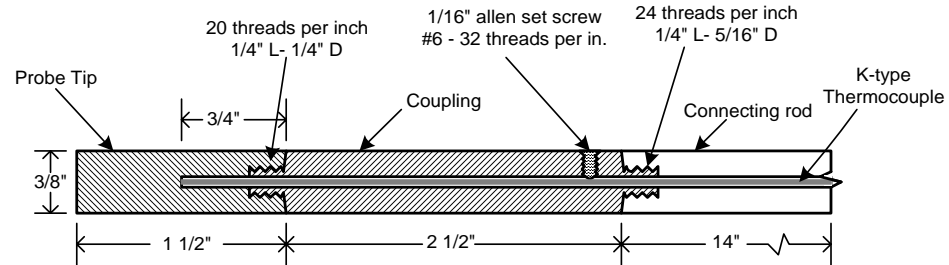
2CHTE probe-coupling-connecting rod assembly [1]
